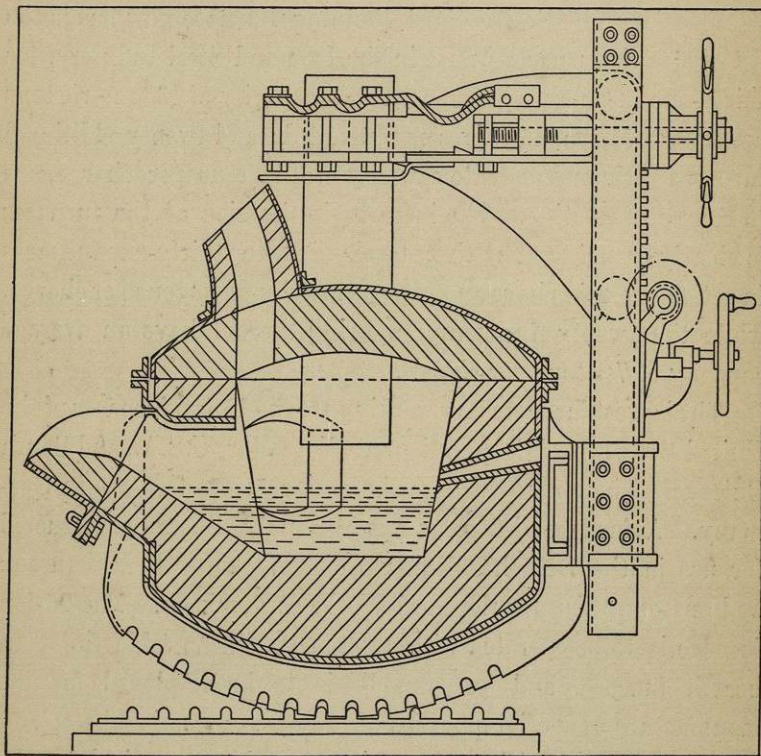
Heroult 3,000-kg. Furnace (early design).
